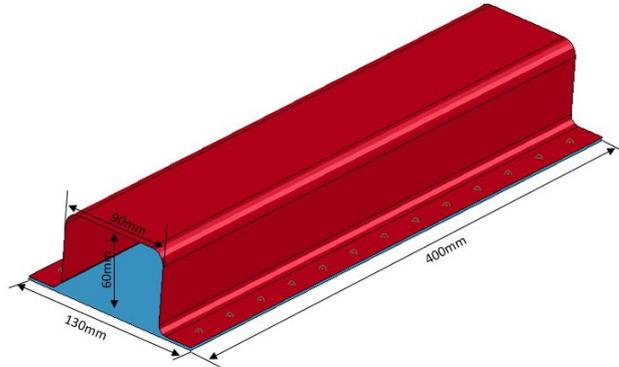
Crash box sample—dots represent the spot weld.
